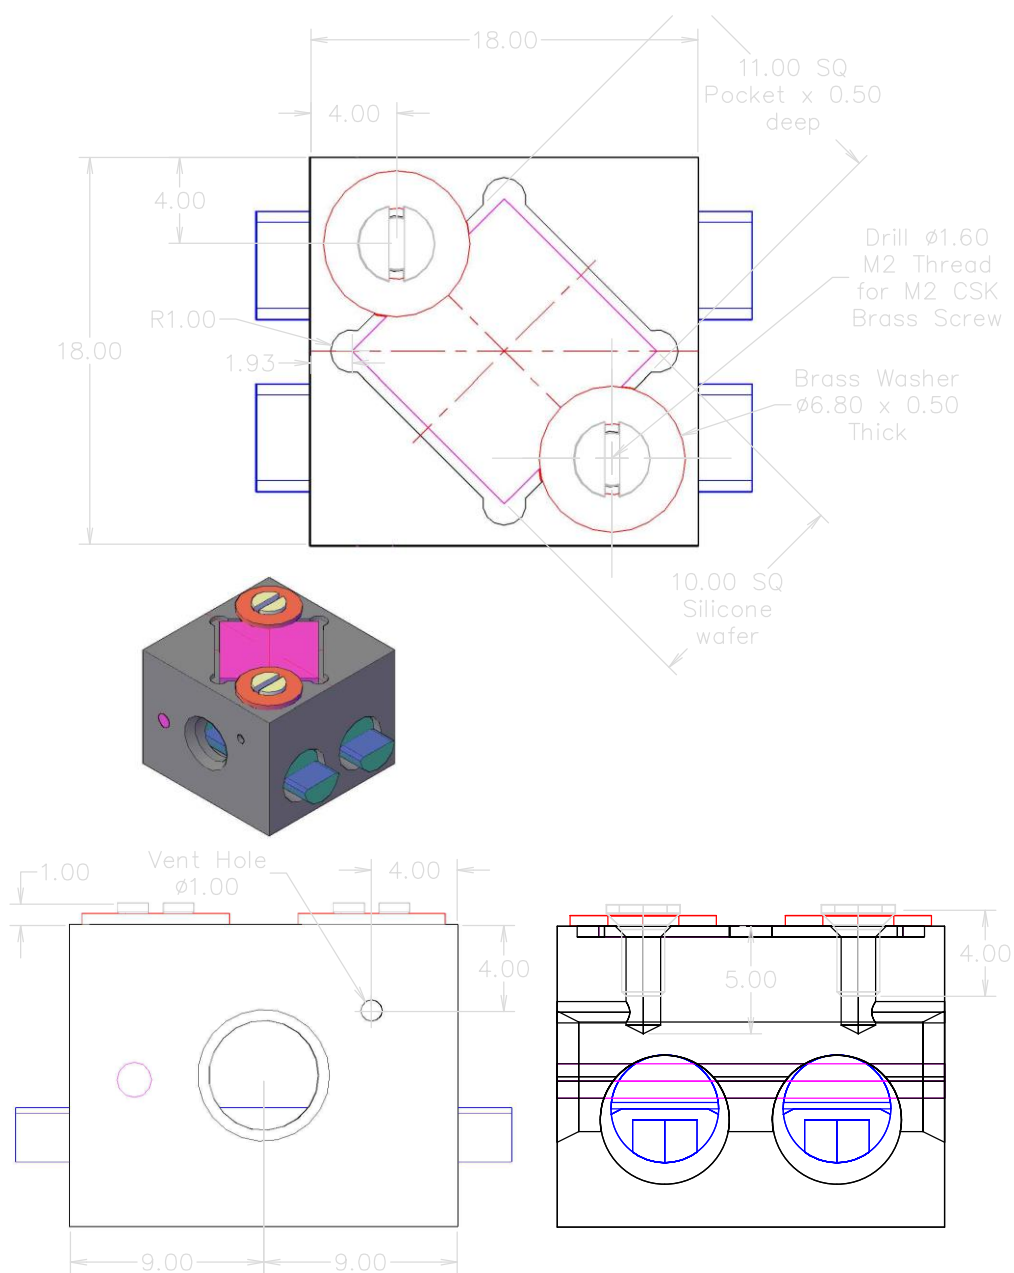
Technical drawing of a modified Leica sample holder for Cryo-OrbiSIMS
